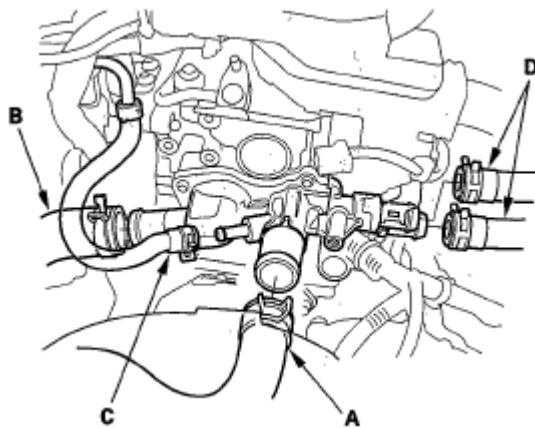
Locating Upper Radiator Hose, Lower Radiator Hose, Water Bypass Hose & Heater Hoses
